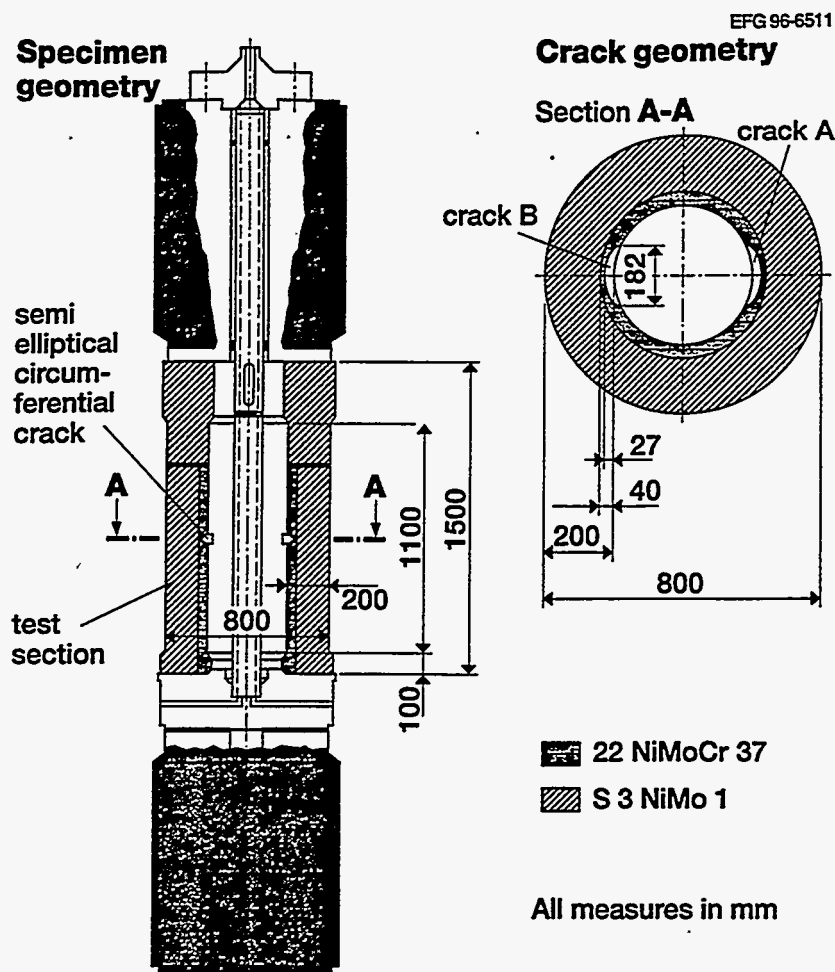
Geometry of composite NKS-5 specimen with symmetric cracks on inner surface (MPA-Stuttgart, Germany)
